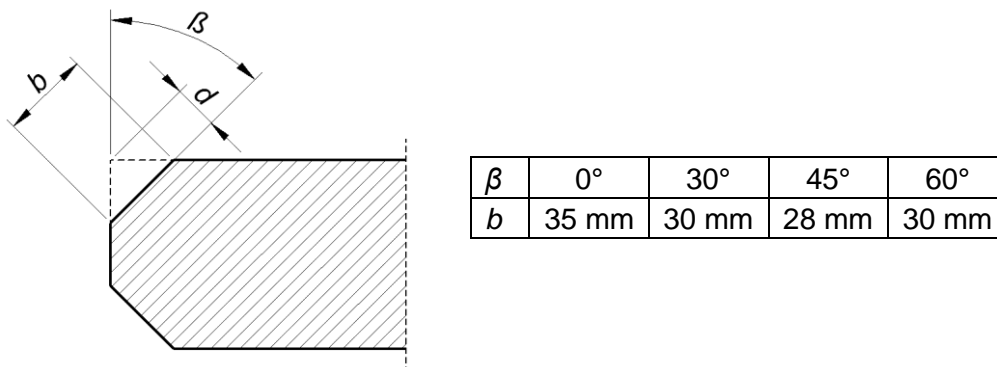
Bevel dimensions; maximum bevel width depending on the angle
